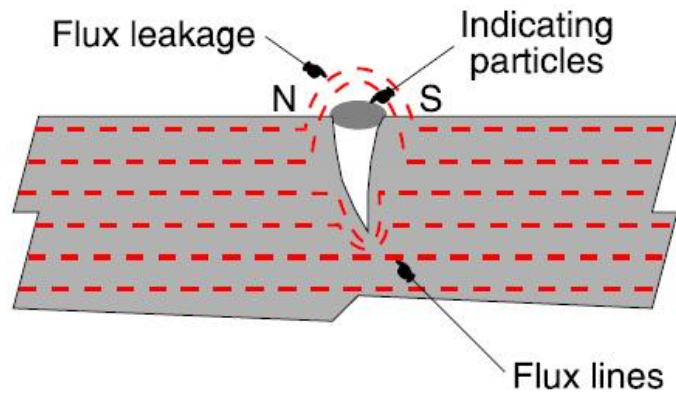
Principle of magnetic particle inspection [6].
